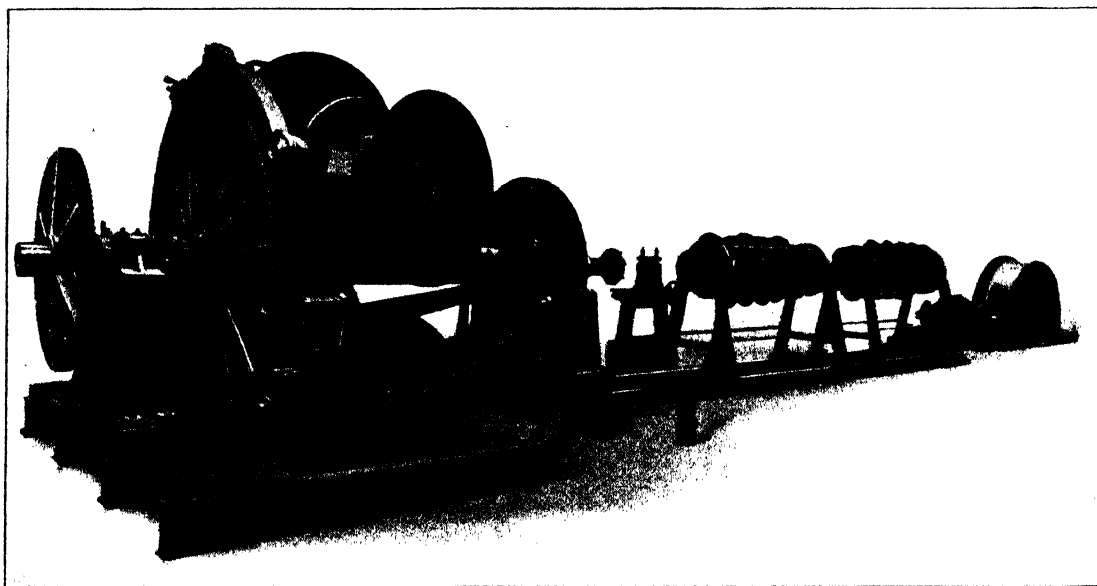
THREE OR FOUR BOBBIN CLOSING MACHINE—JOHNSON AND PHILLIPS.
